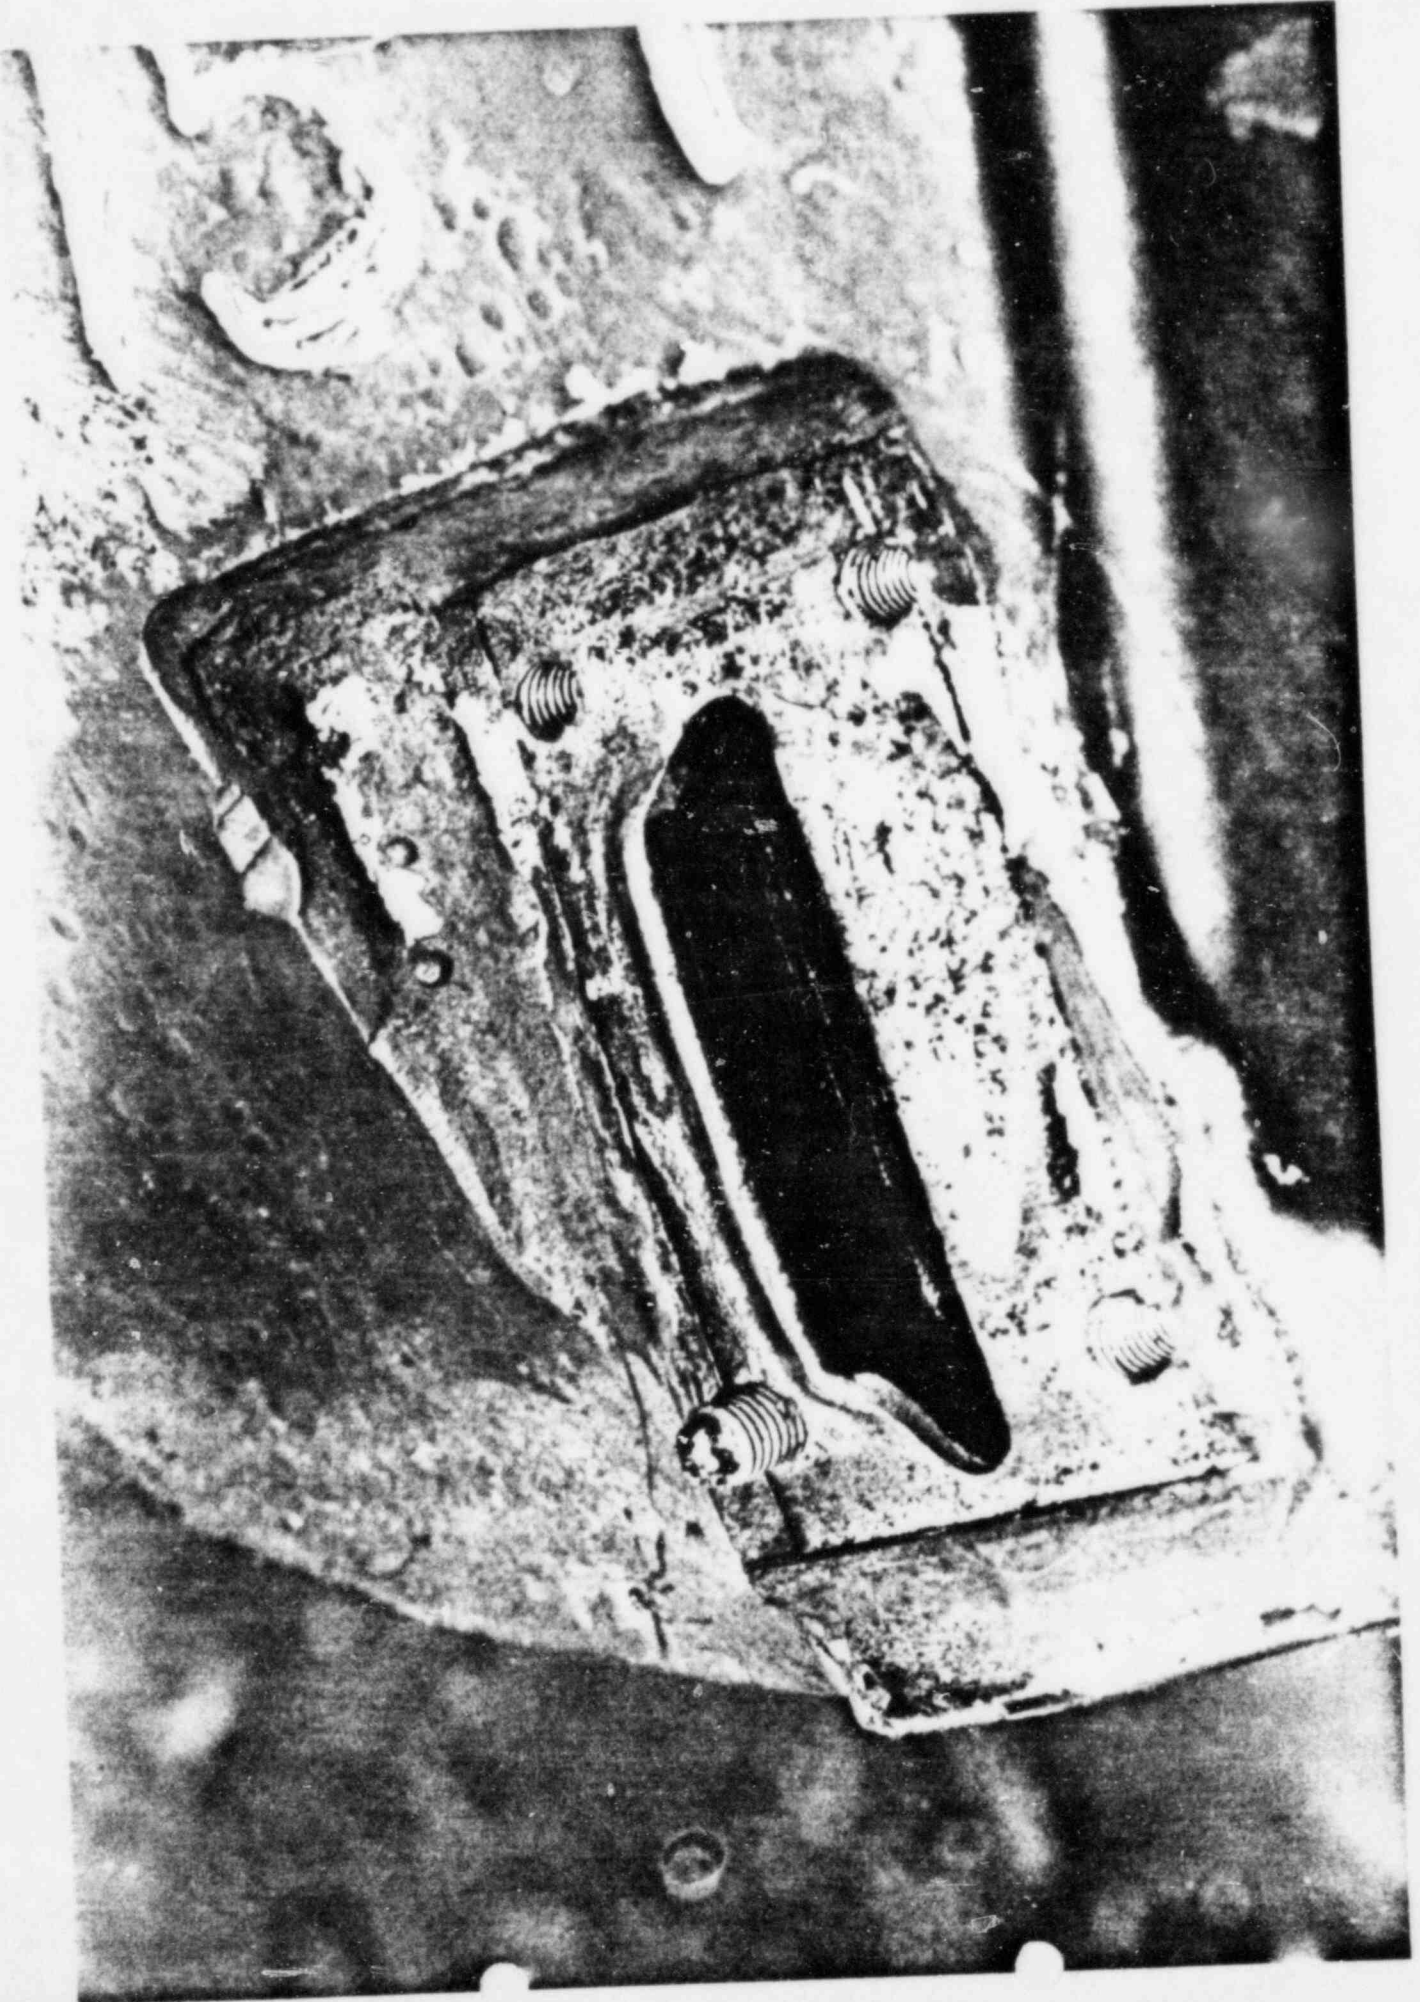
DISC & SHAFT KEYWAY DAMAGE
